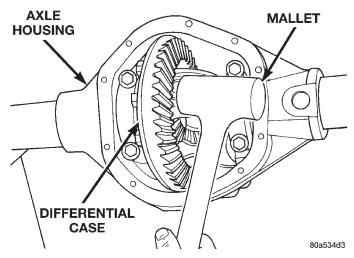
Seat Ring Gear Side Differential Dummy Side Bearing
